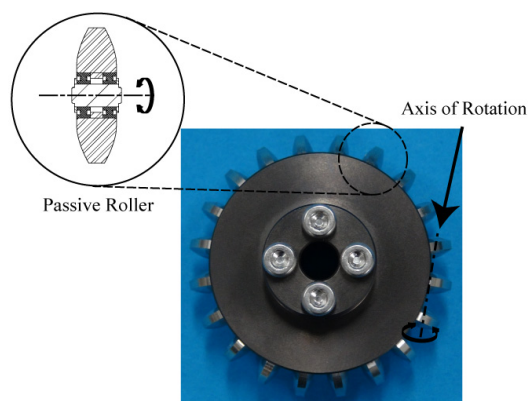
Gear with flat passive rollers and sectional view of the roller unit
